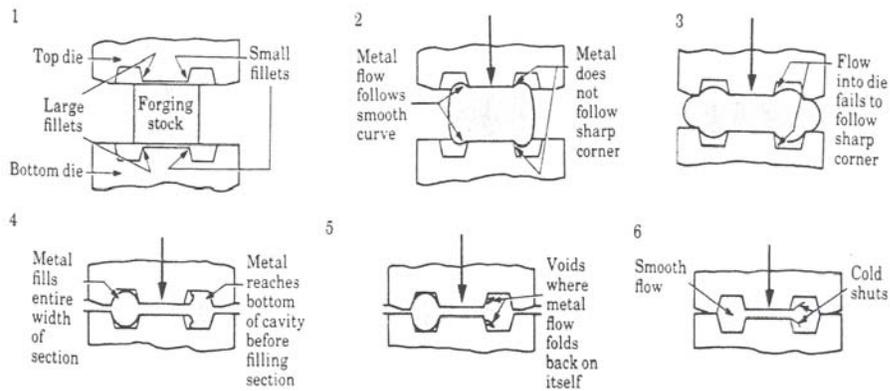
Effect of Fillet Radius on Defect Formation in Forging. On The Right Side of Drawings Small Fillets are Shown Causing Defects [2]
